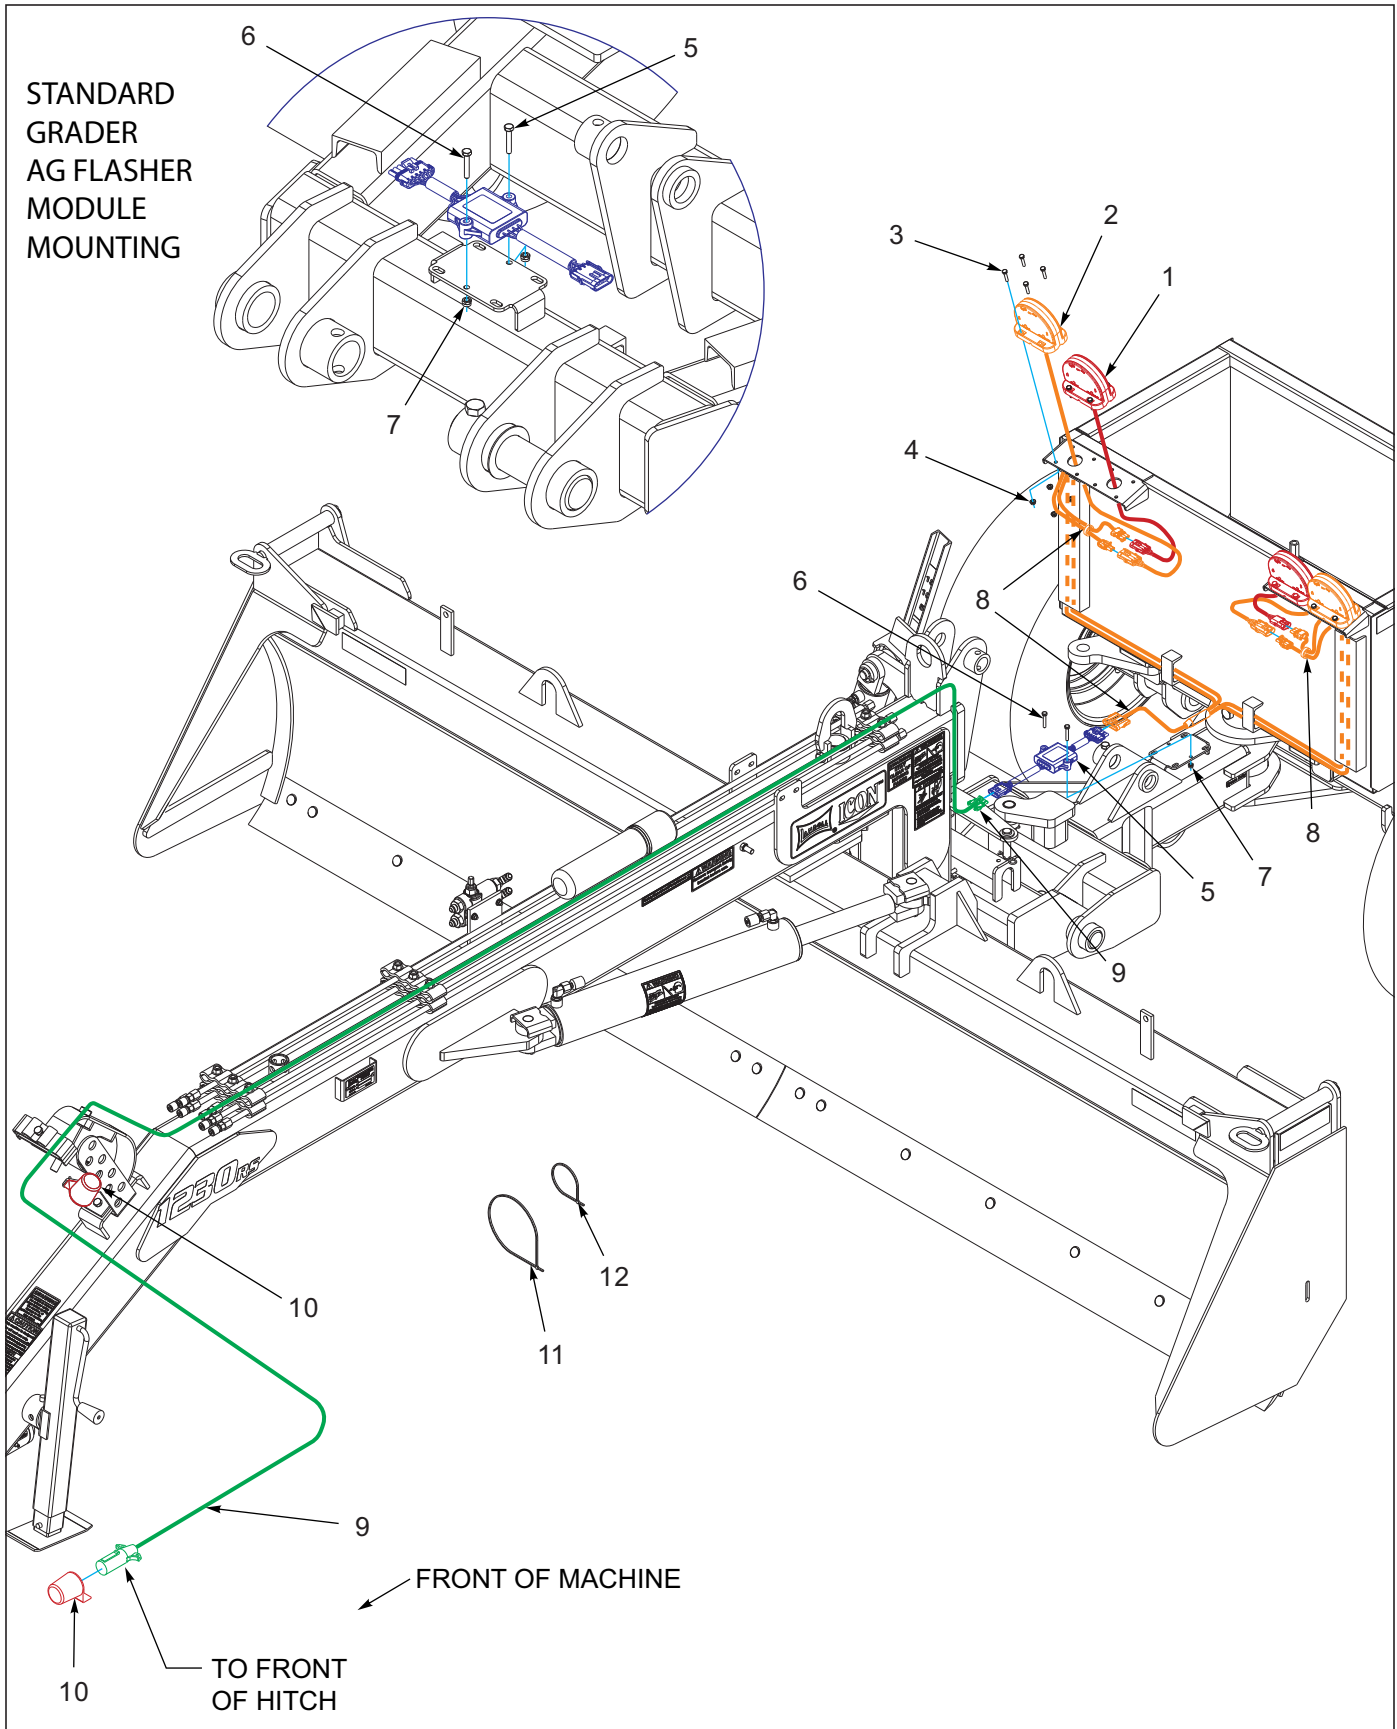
Electrical Assembly W/ LED Lights (2 of 2)
